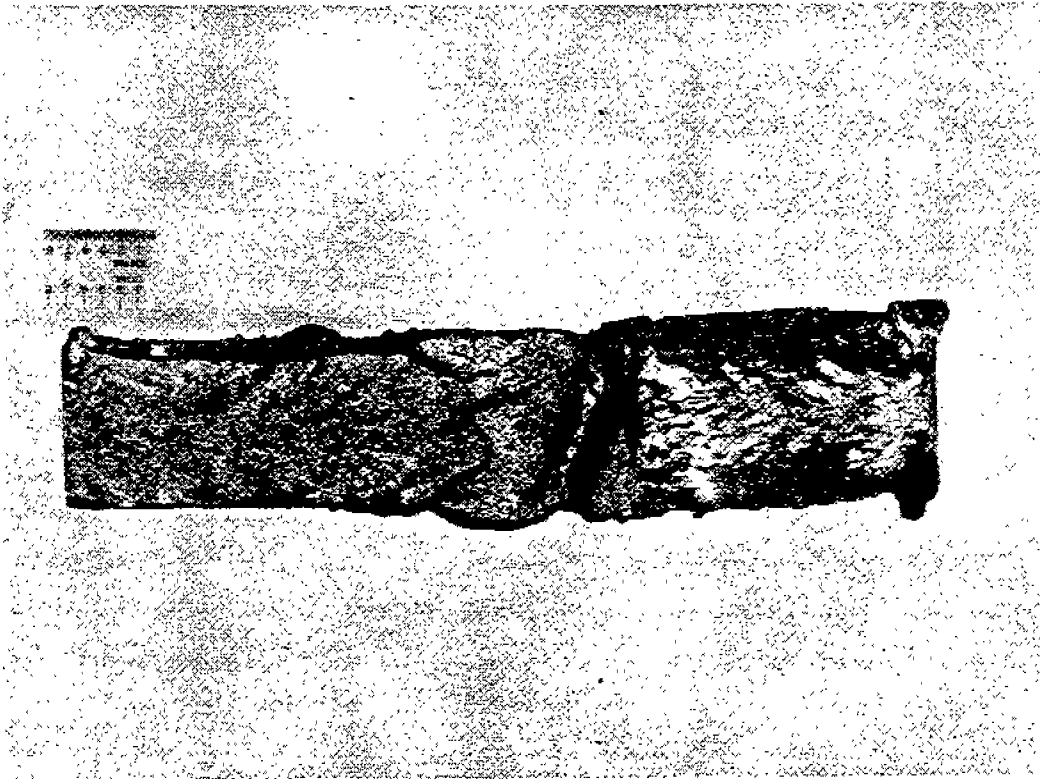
Fracture face at weld joining gunwale plate (Grade EH2) to deck plate (Grade DH₂). See Figure 3-34 for location. Note apparent chevron pattern in the gunwale plate.
